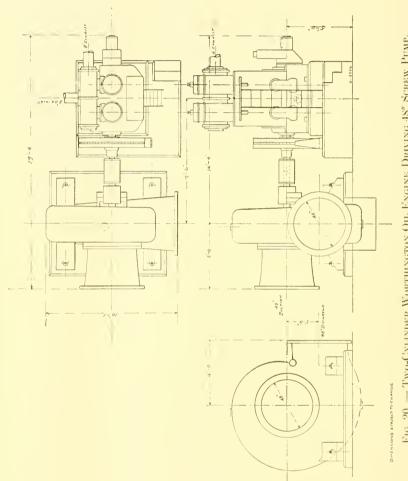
Two-Cylinder Worthington Oil Engine Driving 48" Screw Pump.
